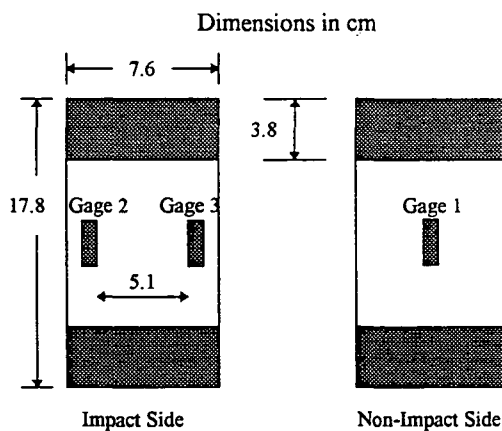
Placement of Stain Gages and Dimensions of Specimens Used.
